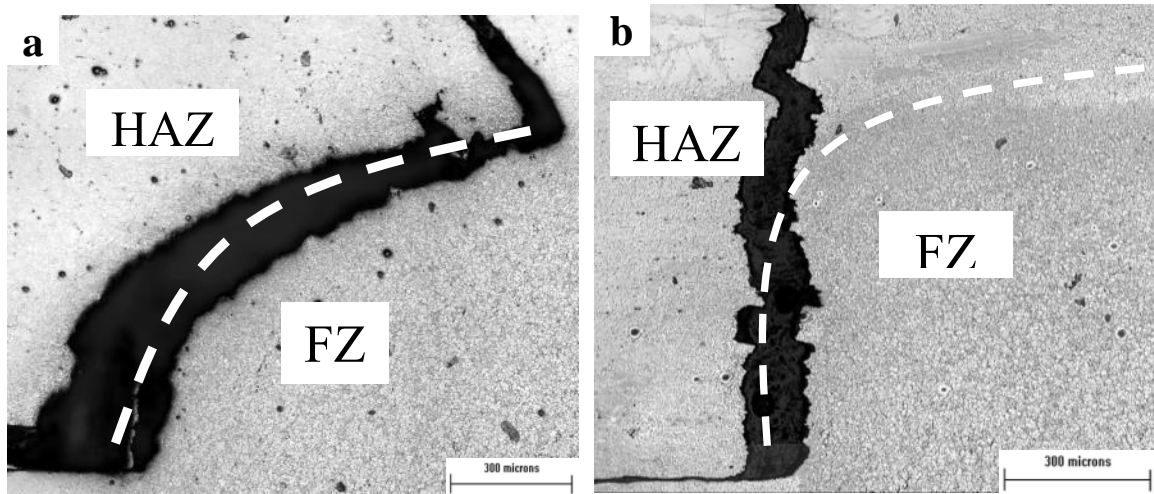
Typical crack pathway for RSW in the as-welded condition (a) AZ61; (b) AZ80
